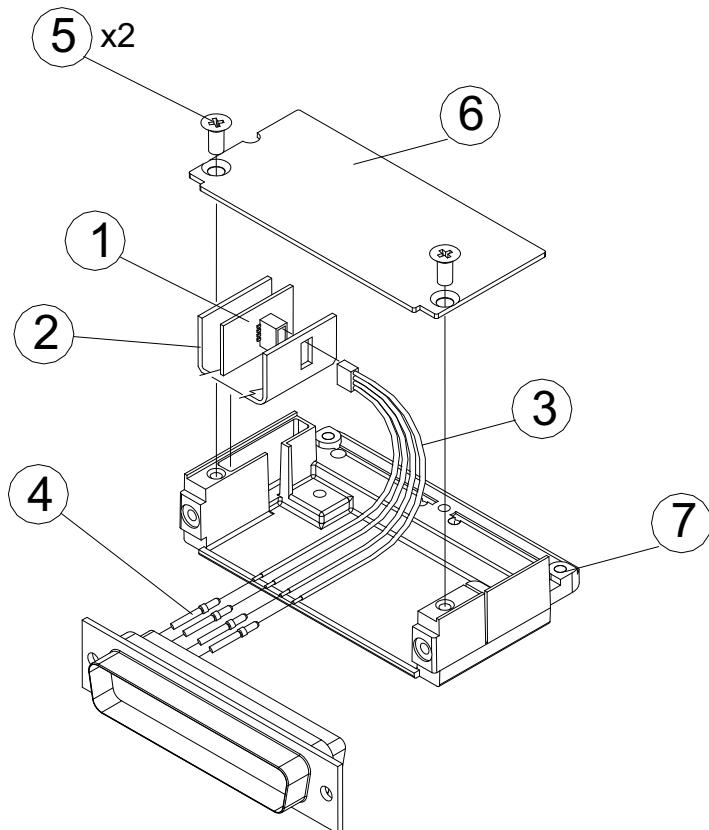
Backshell Assembly (Configuration Module with Spacer)
